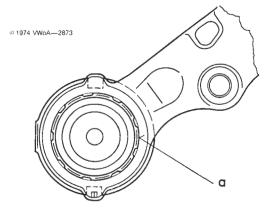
Peened ball joint cover. Cover material is expanded as indicated by a.
